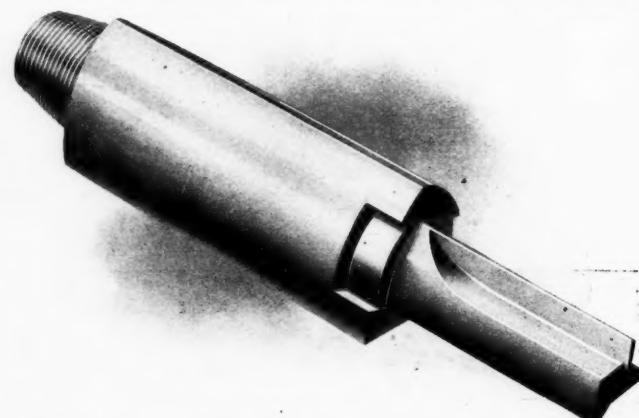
Drill, with Sleeve, for Sharp Cornered Holes.
